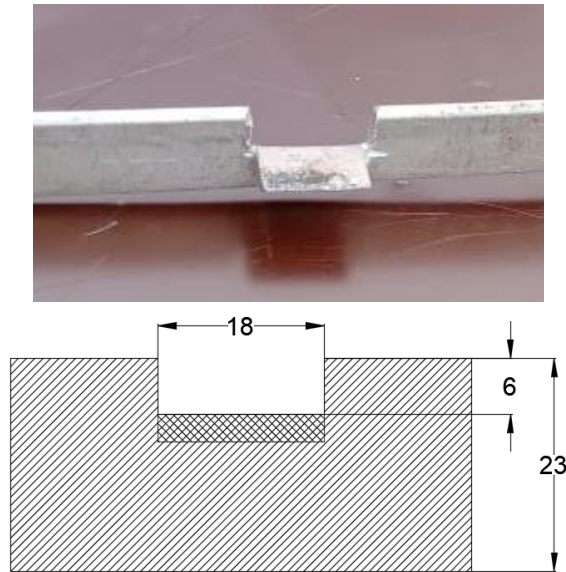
Photographic view and geometrical view of plain tape horizontal wing cut
